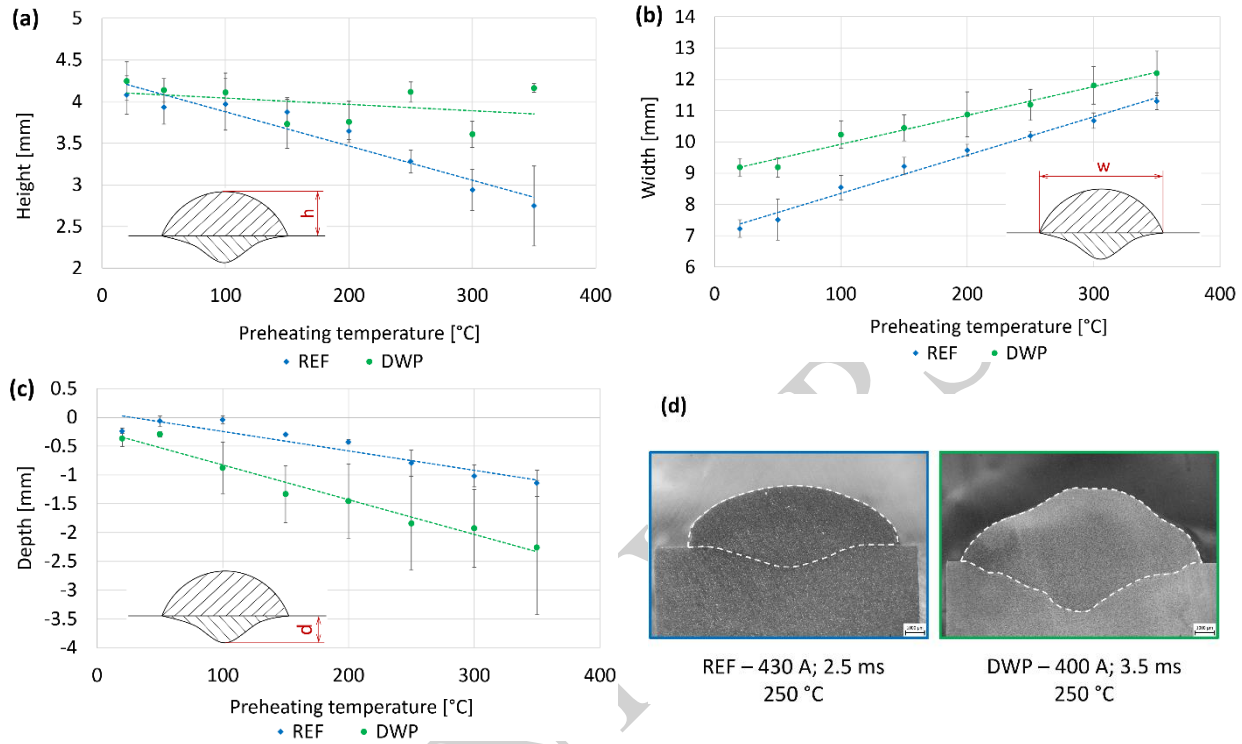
(a) Height (b) width (c) penetration depth of single-track weld bead (d) cross-section of selected samples
